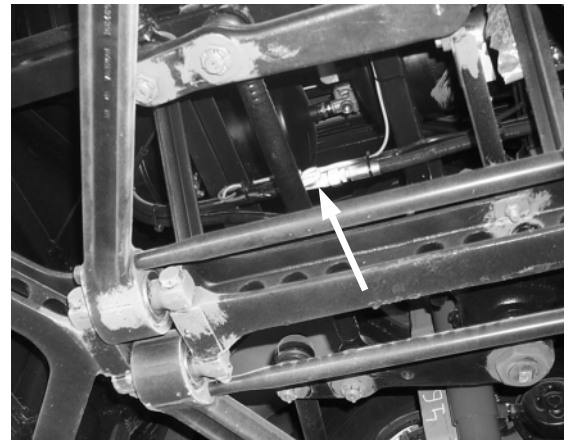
Beneath the coach at the front - C2045 - central tunnel line to steering gearbox line connection. Check one crimp fitting.
